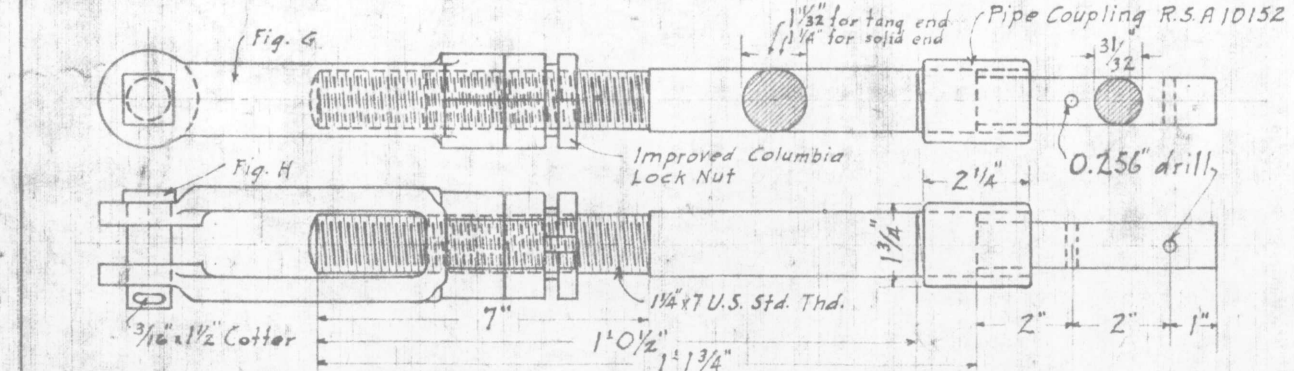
Fig. C - Screw jaw - solid end 1'0 1/2" - tang end 1'1 3/4" (O.H. Steel)
